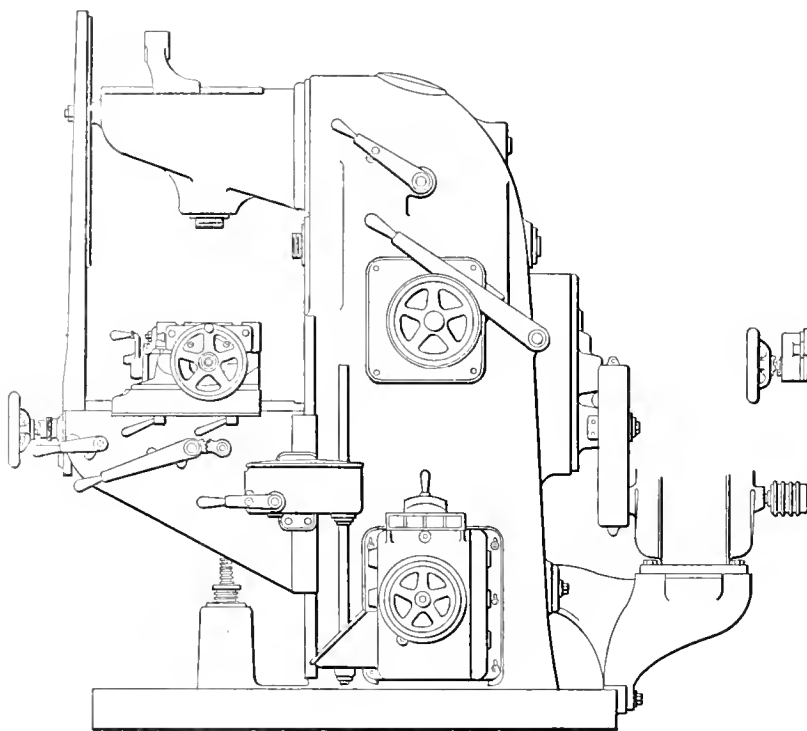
Side Elevation of Combined Horizontal and Vertical Spindle Milling Machine, made by the Société Française de Machines-Outils.
